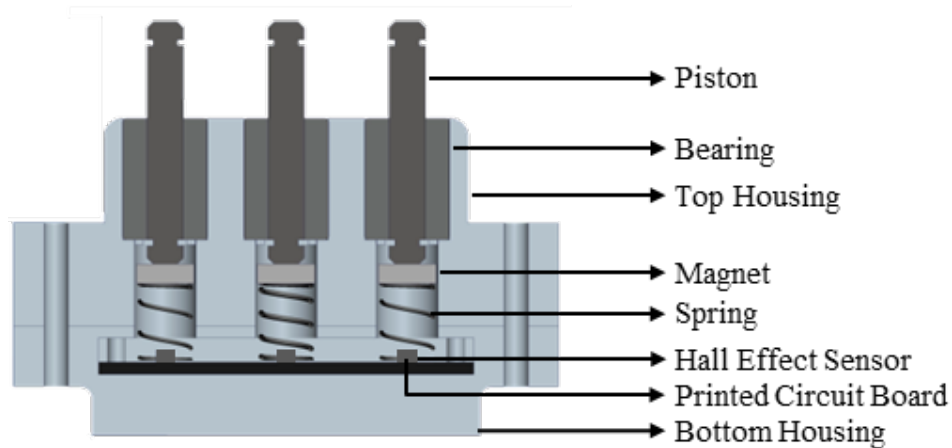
Cross section view of the model of the multi-probe magnetic sensor
